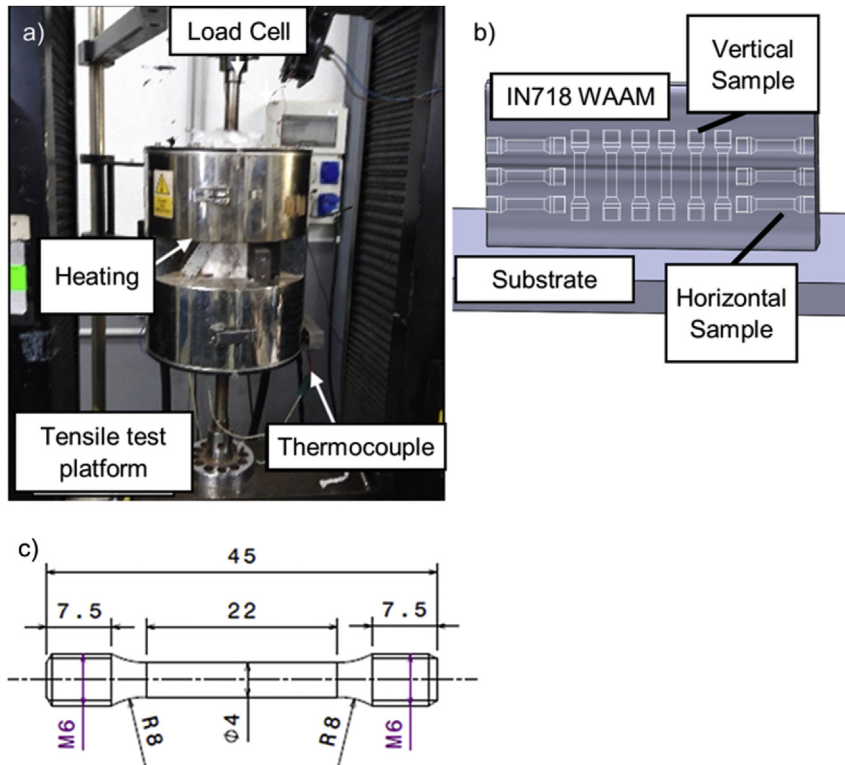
(a) Tensile test platform, (b) Schematic representation of the location of the specimens; (c) Dimensions of the test specimen.
